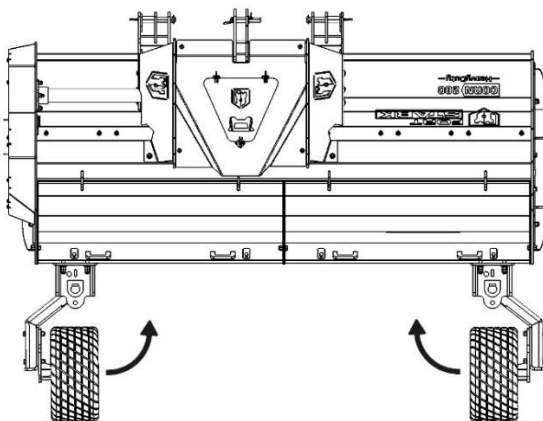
Rotating the support wheel bracket towards the centre of the machine
